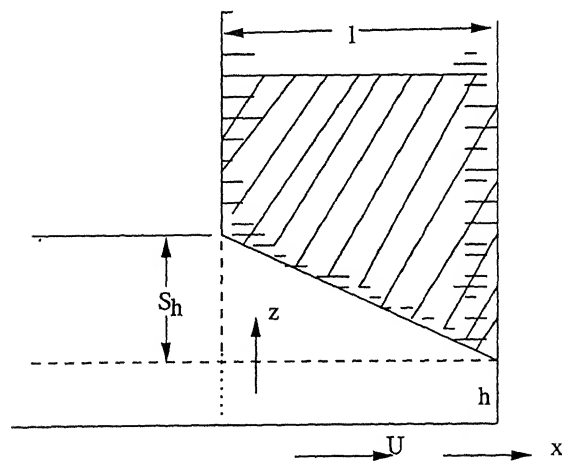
Fixed-incline (tilted pad) slider bearing
